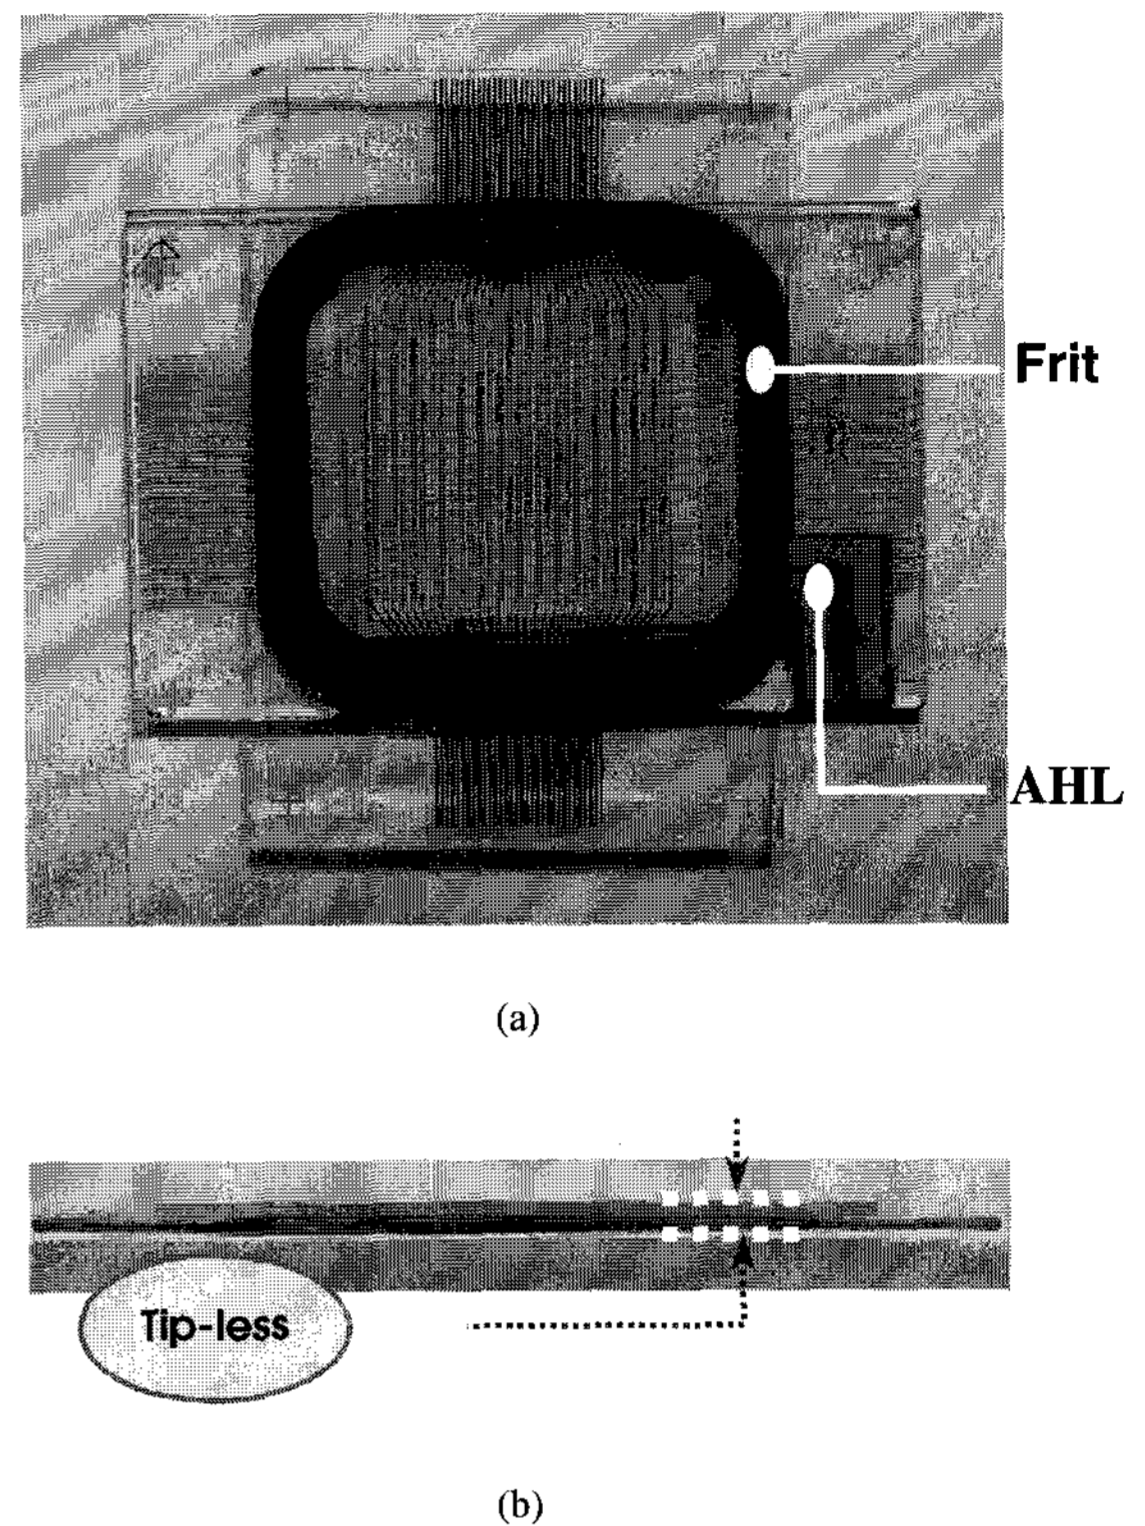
Operational tubeless-type PDP panel sealed by using the vacuum in-line sealing technology : (a) front-view and (b) side-view.
